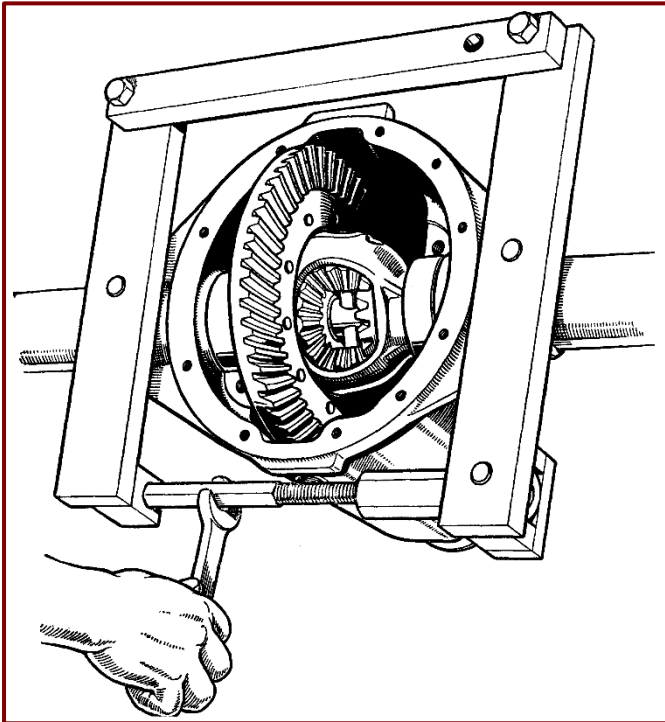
Stretching Axle Casing in order to remove Differential Assembly.
